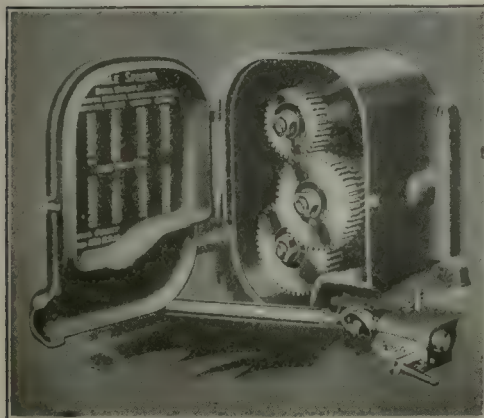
SPINDLE-SPEED CHANGE GEARS INCLOSED IN HEAVY CAST-IRON BOX
